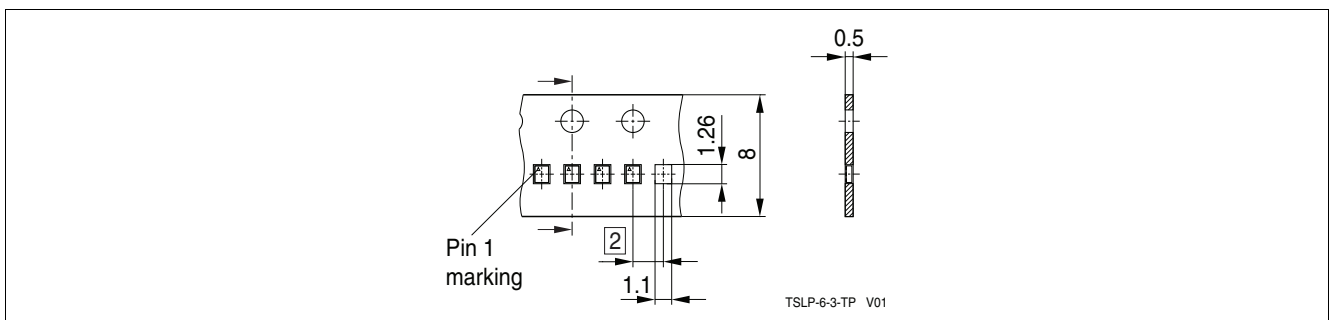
Tape & Reel Dimensions (Ø reel 180 mm, pieces/reel 15000)
